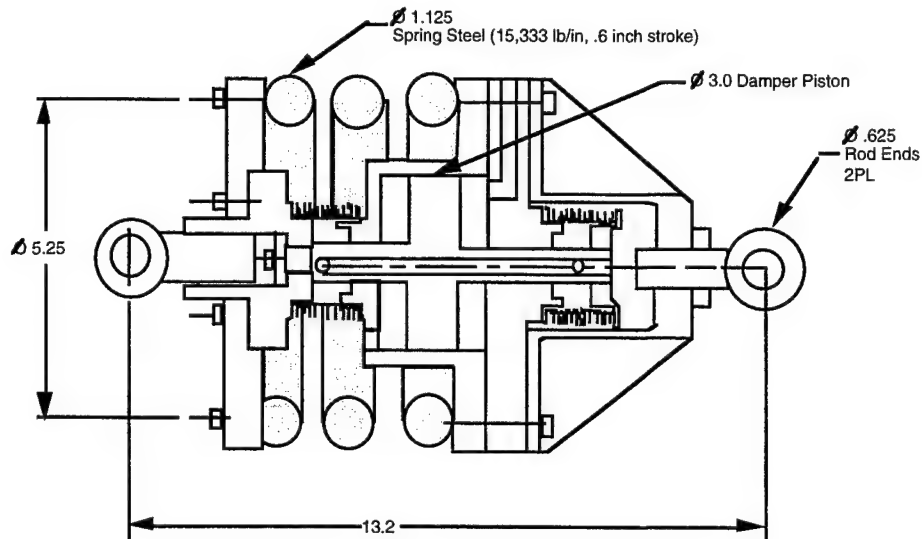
LVIS Mechanical Spring/Hydraulic Cross-Link Isolator Member
